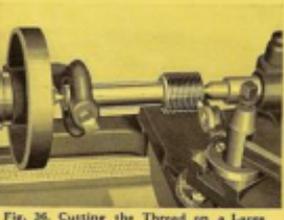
Cutting the Thread on a Large Diameter Special Tap.
